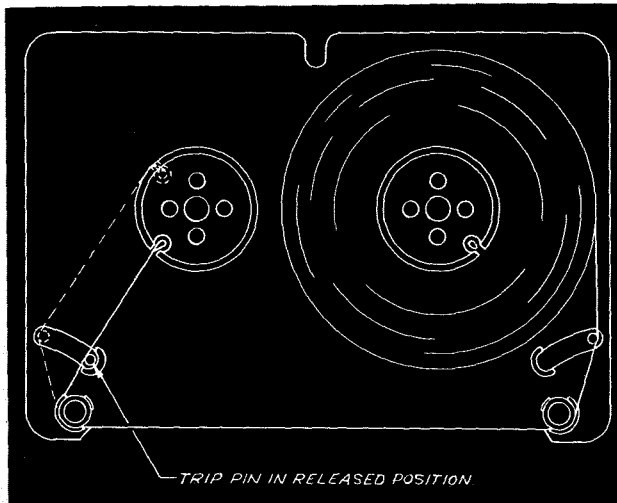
Sketch showing how tape passes over a trip pin located on the mechanical assembly.
